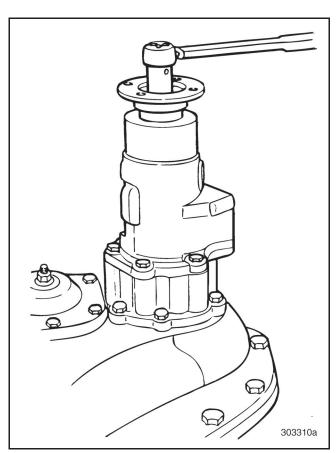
Tightening PTO Shaft Output Flange Capscrew
